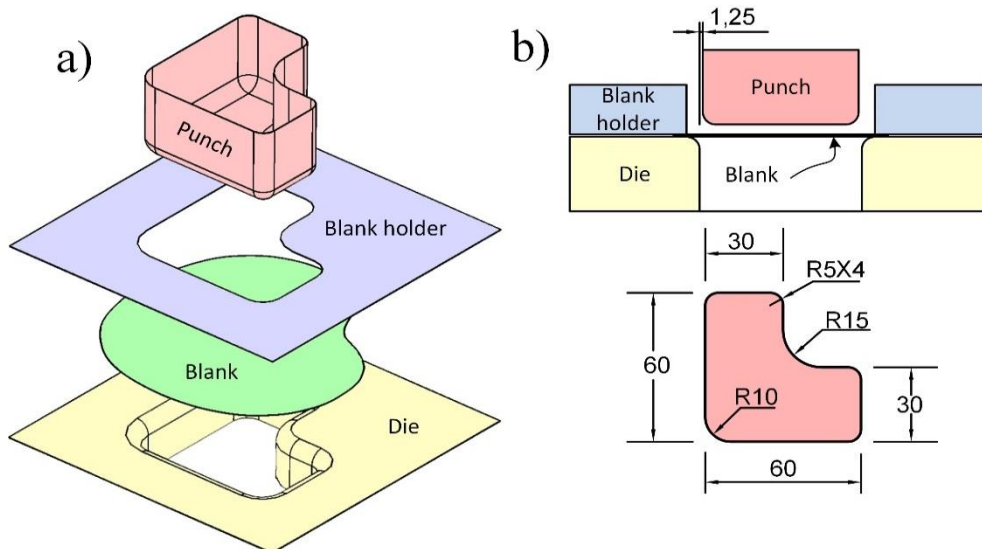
The deep drawing dies geometry; a) the deep drawing die assembly, b) die dimensions.
